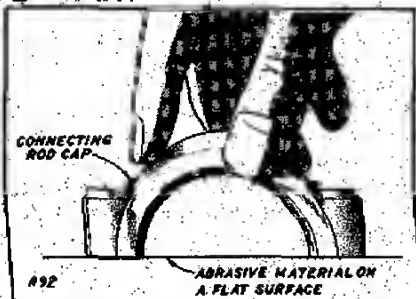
REDUCING CONNECTING ROD CLEARANCE
